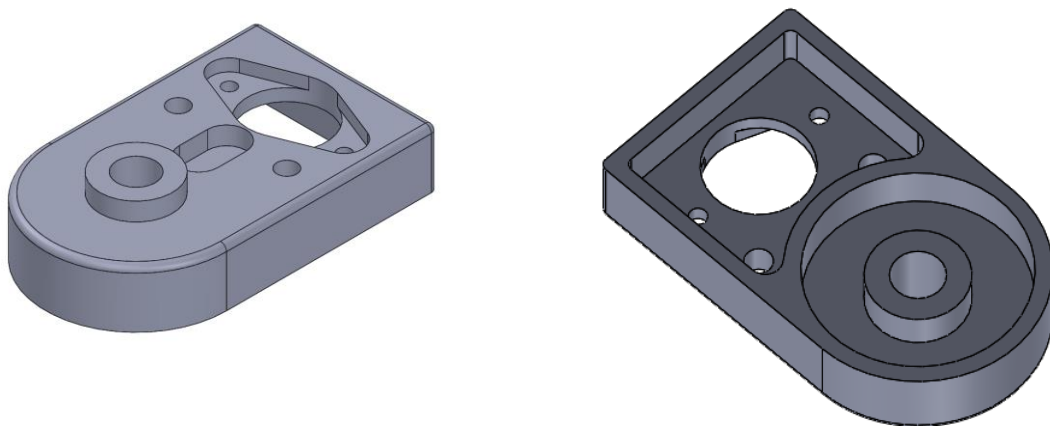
Anchor isometric view from top (left); Anchor isometric view from bottom (right)
